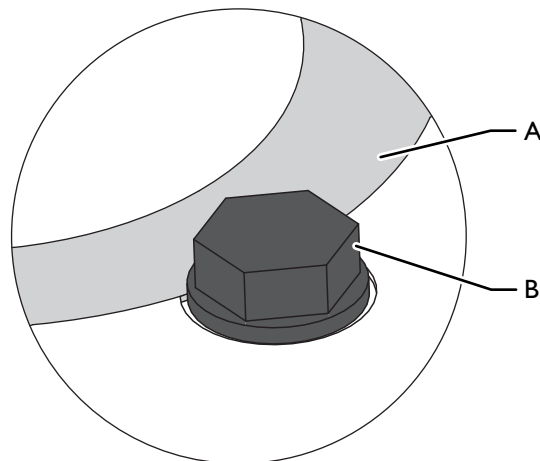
Blocking the eccentric ring: Hexagonal screw
